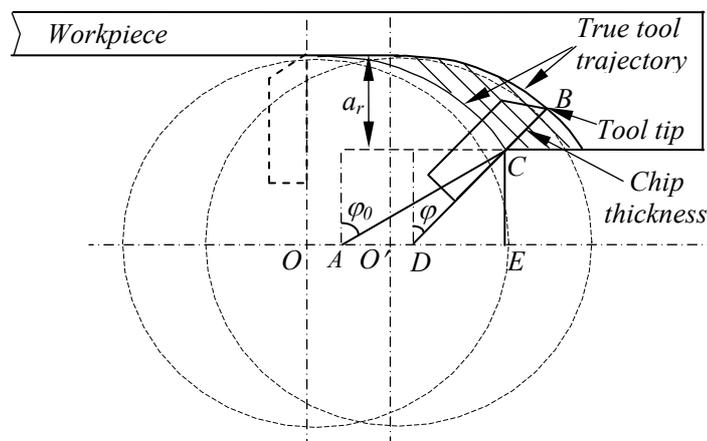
Cutting zone geometry for the second pass of pocketing
